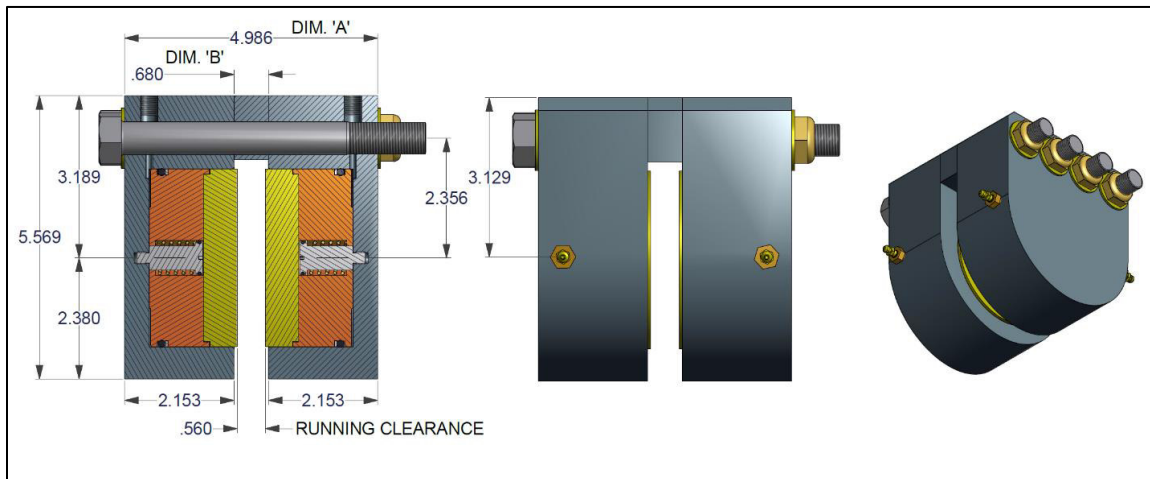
Drawing views including cutaway (left), top (middle), and isometric (right) of the caliper brake. Note all dimensions are in inches. Supplied by WC Branham.
